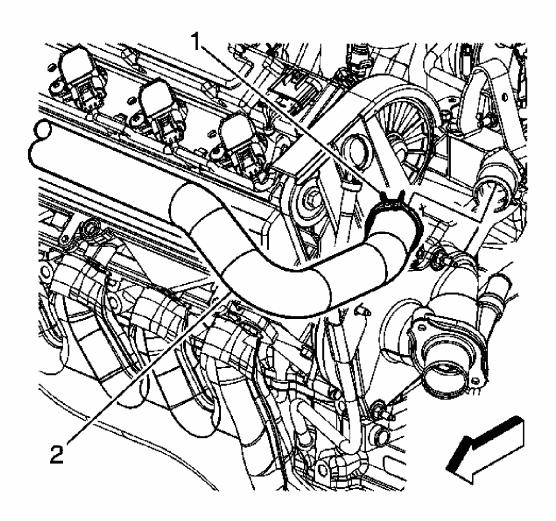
View Of Radiator Inlet Hose & Clamp Courtesy of GENERAL MOTORS CORP.
